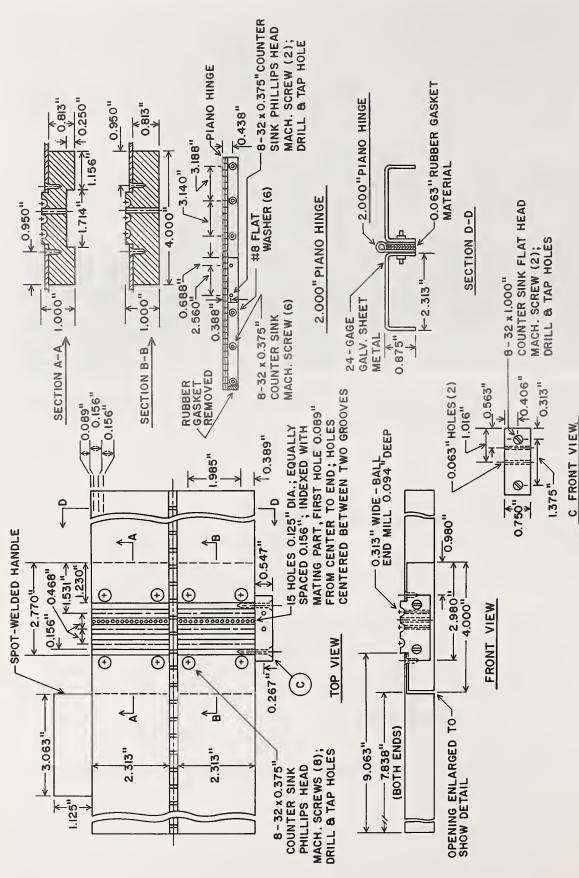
Details of three-cell false mold used for welding two sections of bandoleer strips together.
